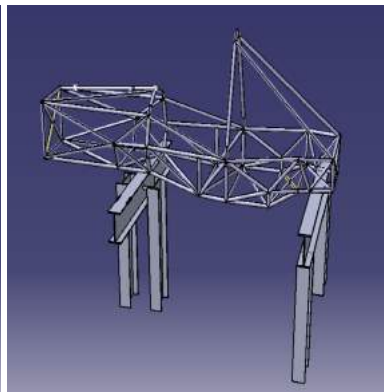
Assembly: Torsion rig and Chassis - Model 2
